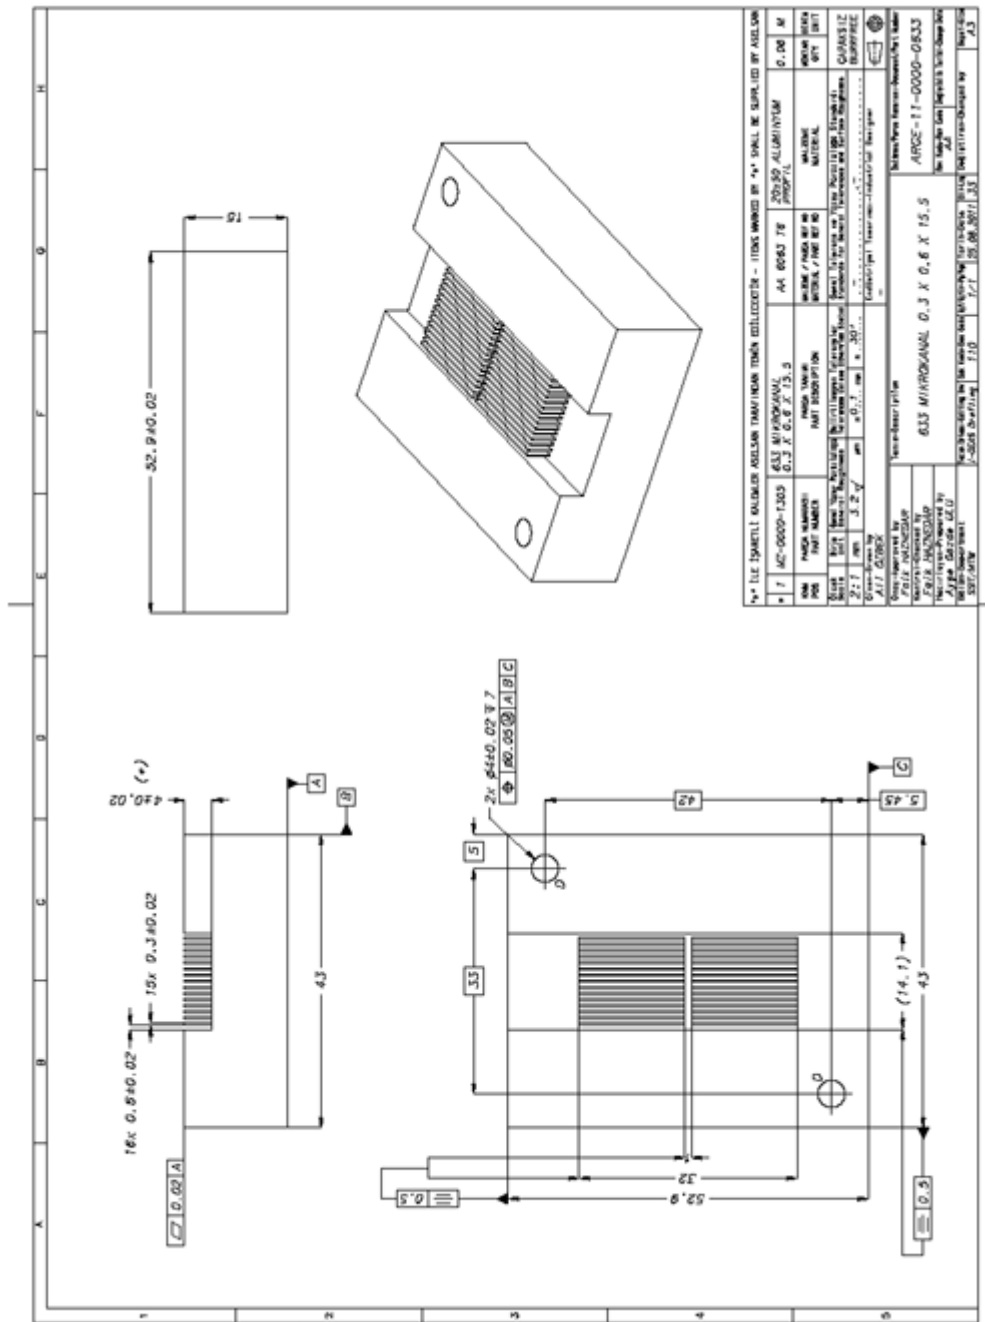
Technical drawings of 600 micron wide singe interrupted channel
